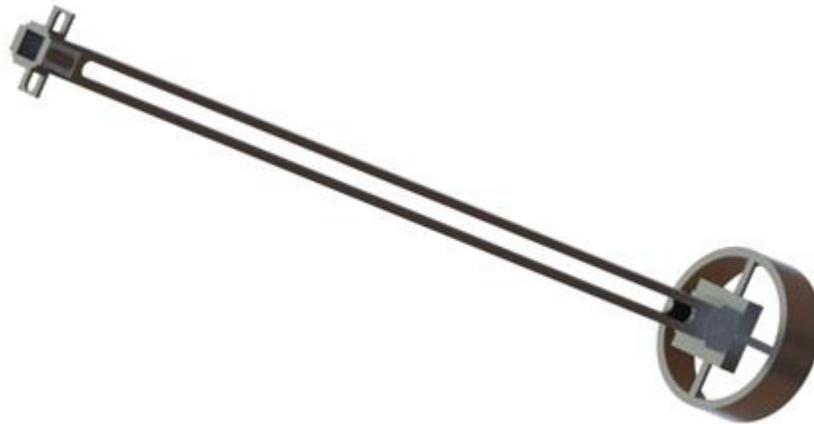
Rendering of the deployment arm assembly and thread coupler.
